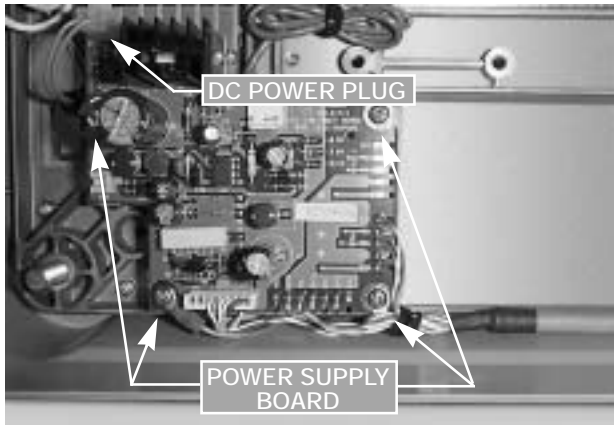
Disconnect DC Power Supply Plug and Remove the Four Power Supply Board Screws
